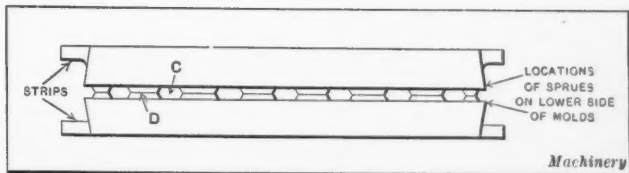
Appearance of Assembled Top and Bottom of Mold, showing Finish Strips
